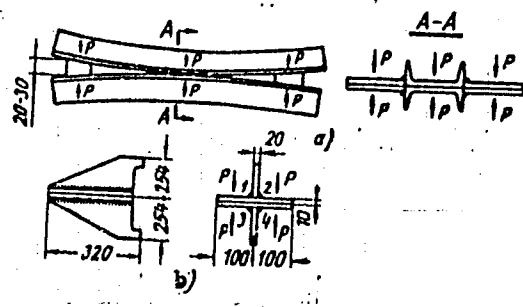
Welding of elements of AMg61 alloy, attached in pairs
